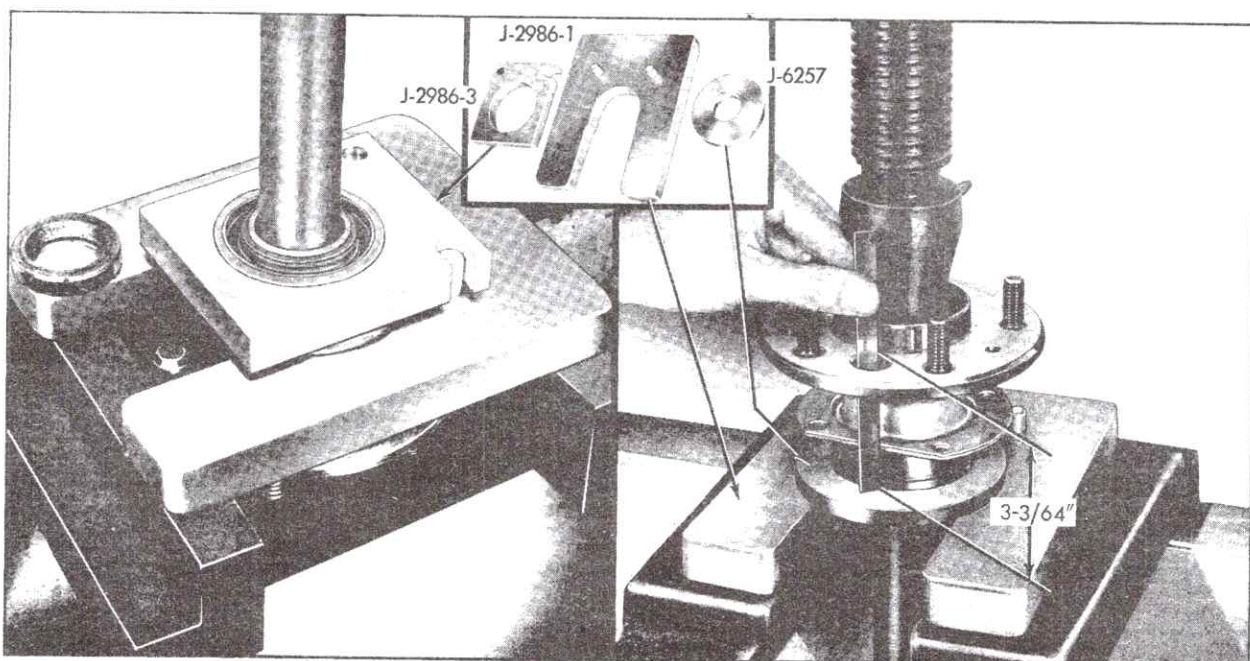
Removing and Installing Rear Wheel Bearing
